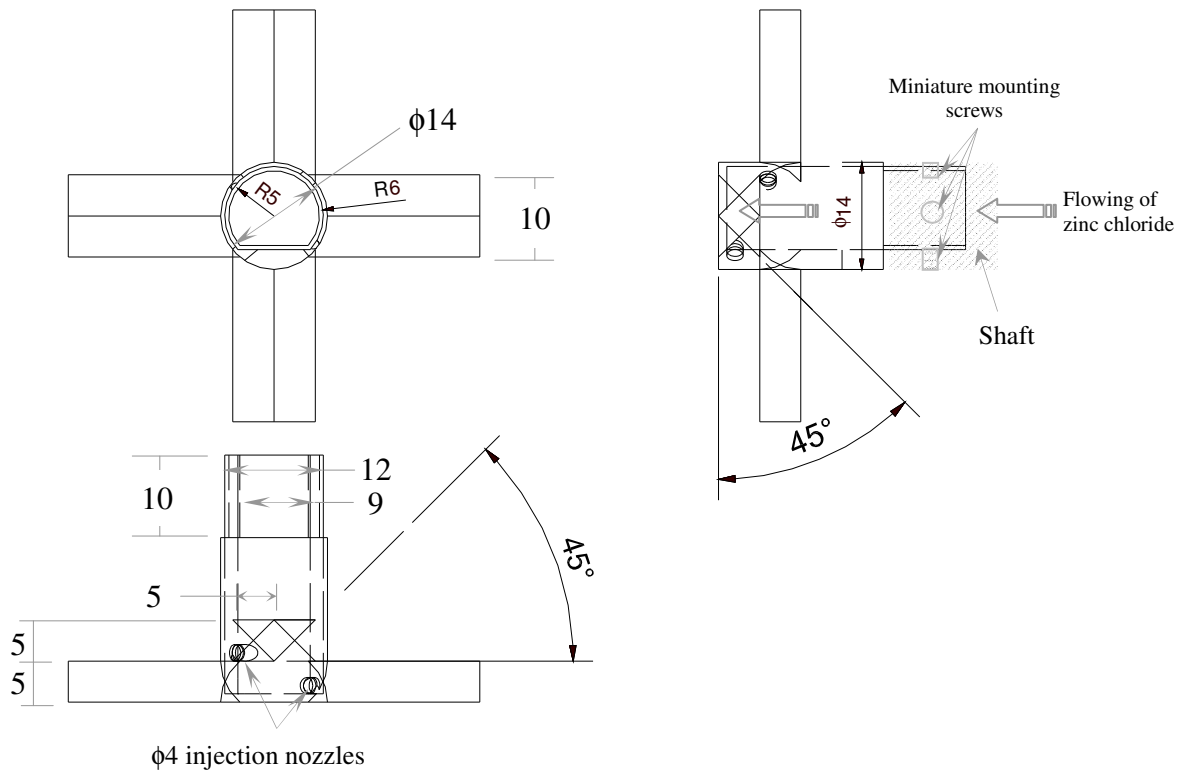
Schematic of mixing blade for DM installer B and C (all dimensions in mm).
